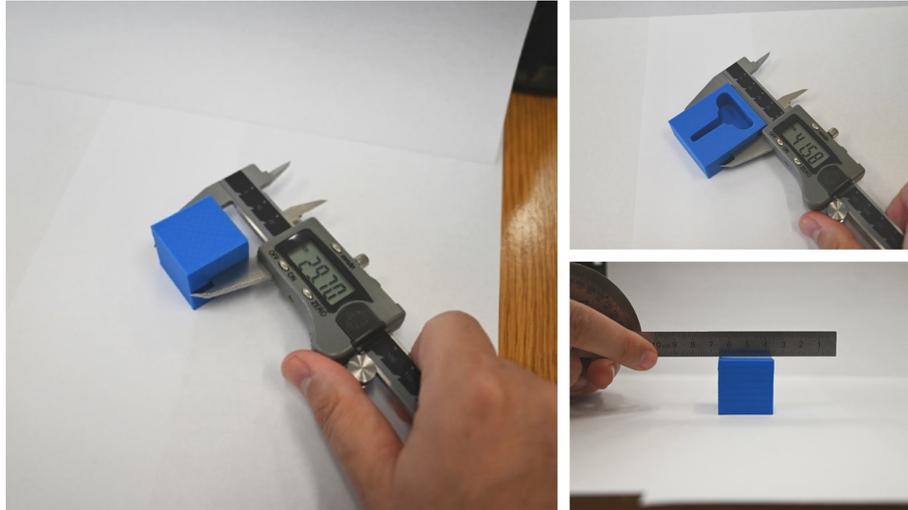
Example of dimensional measurements performed using digital calliper and a linear ruler on FDM-printed ABS parts for shrinkage and dimensional accuracy assessment
